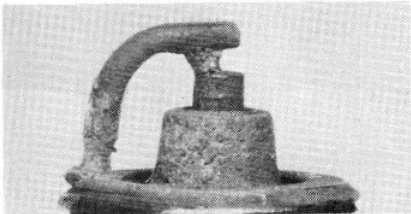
Too hot. Light tan to white deposits with flaking and blistering. Electrodes eroded and burned. Engine overheating or detonating or plug too hot for operating conditions. Install colder plug and retest. If performance does not improve check for other causes of overheating or detonation.
